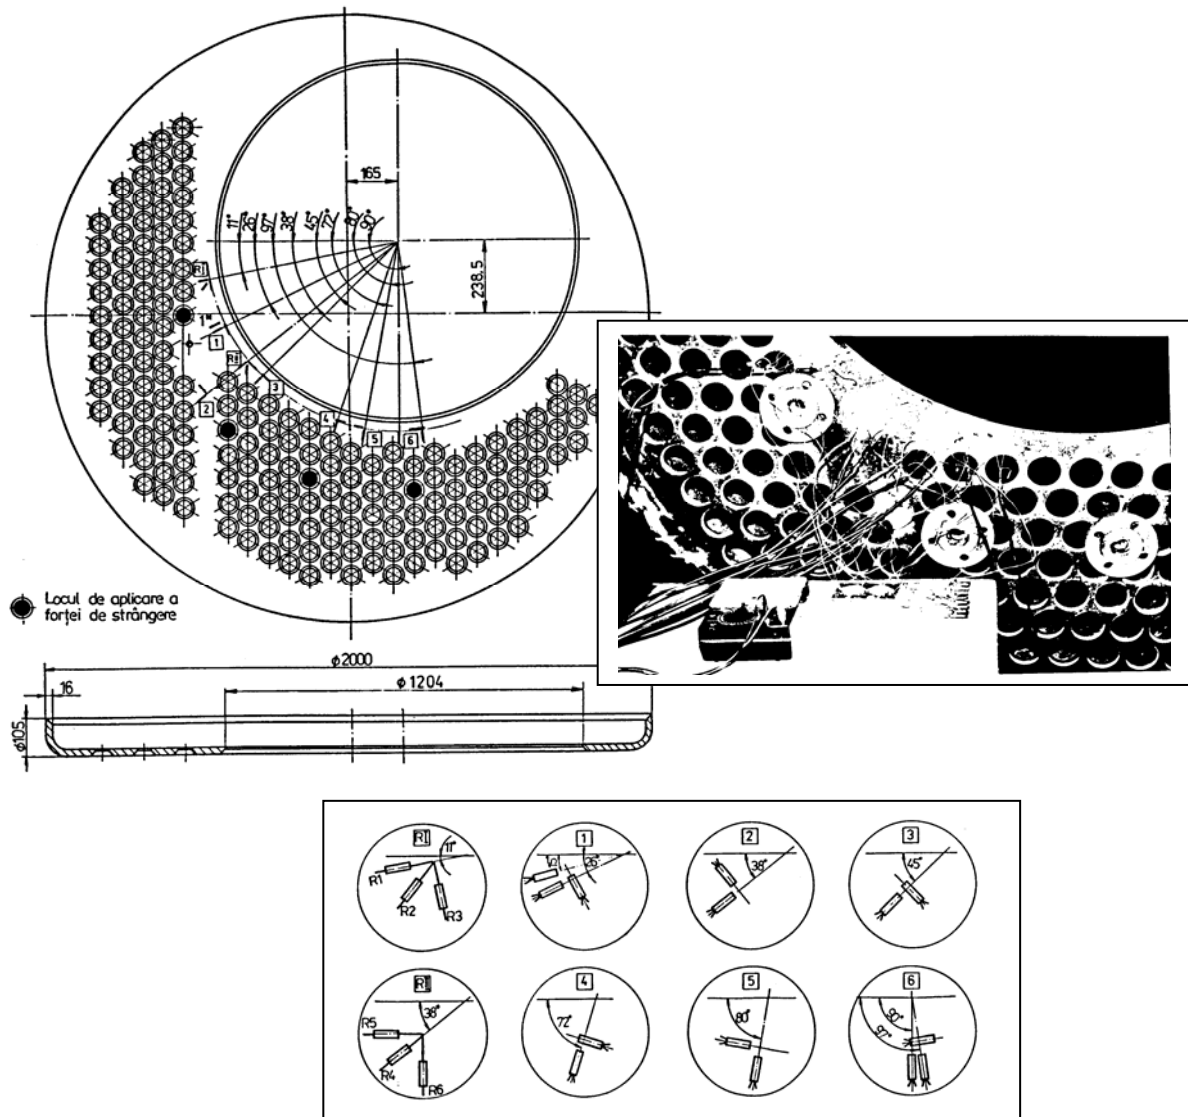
An assembly view of a tubular behind plate, with strain gauges placement and the photo ready for measurements
